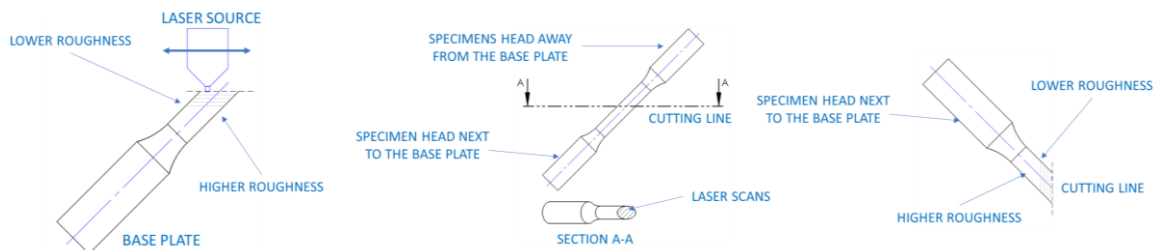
Positioning details in slanted manufactured specimens for a correct cutting operation
